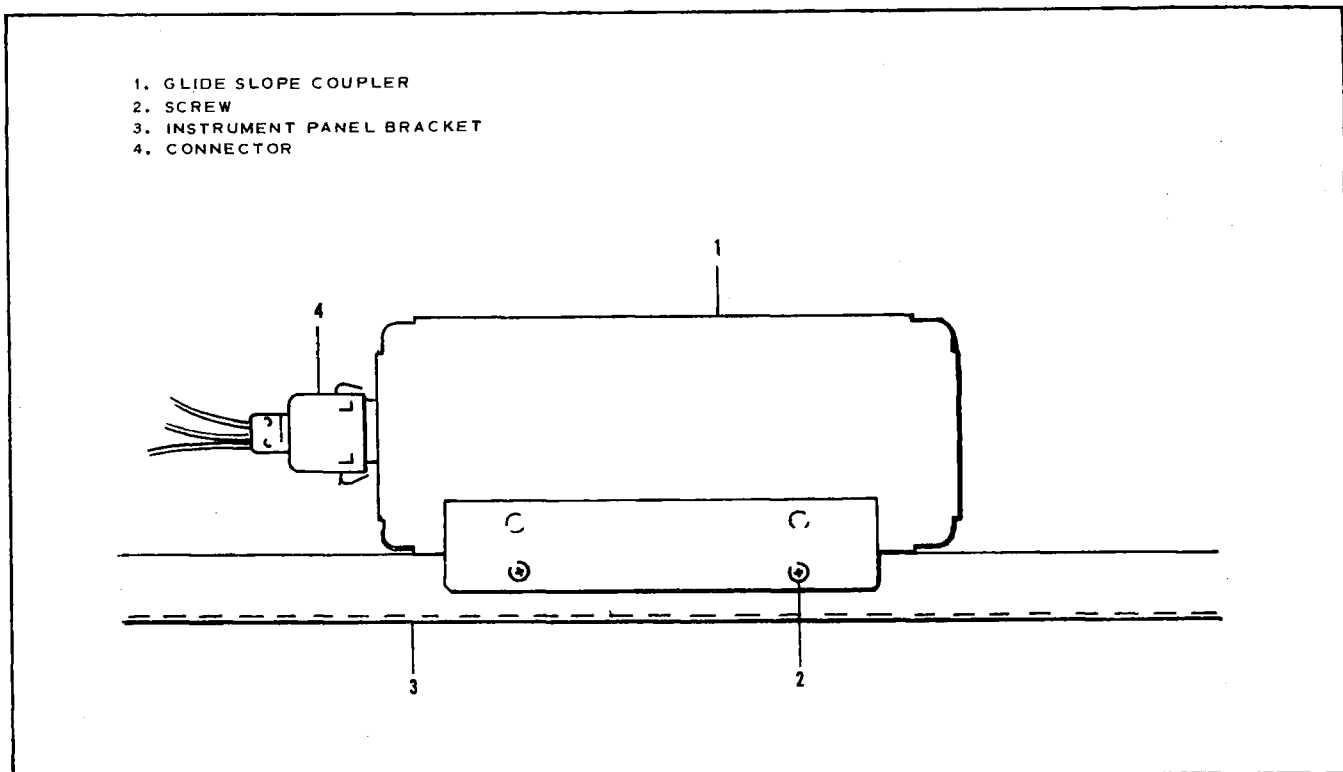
Glide Slope Coupler Installation, PA-31P
